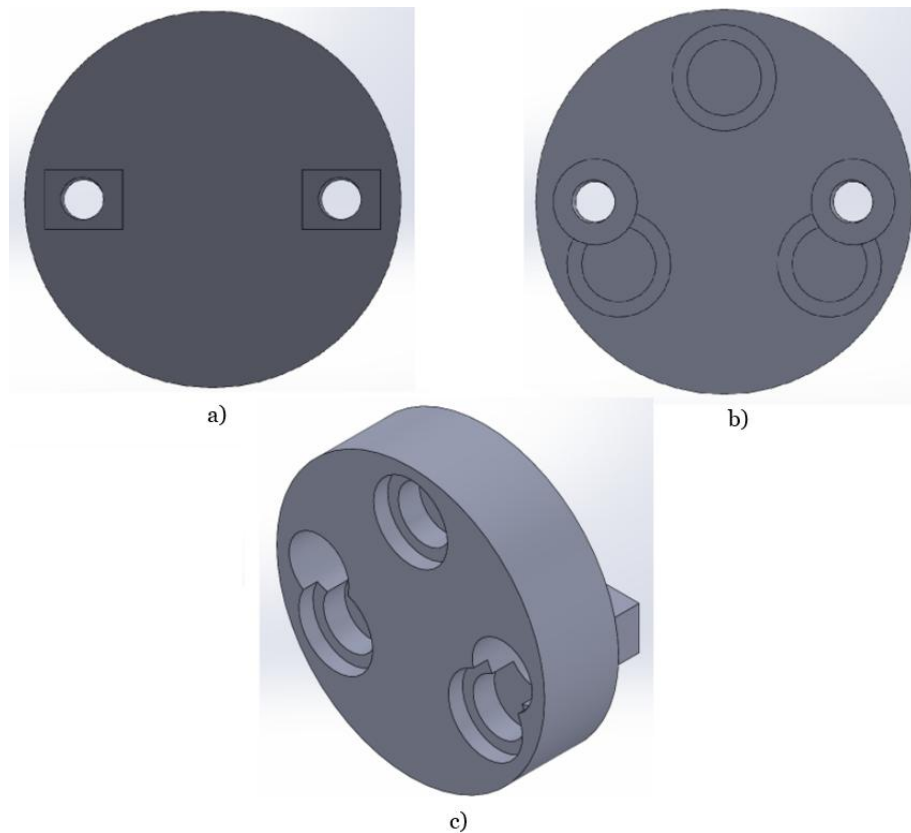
Carrier 3D model with different views: a) back; b) front; c) isometric
